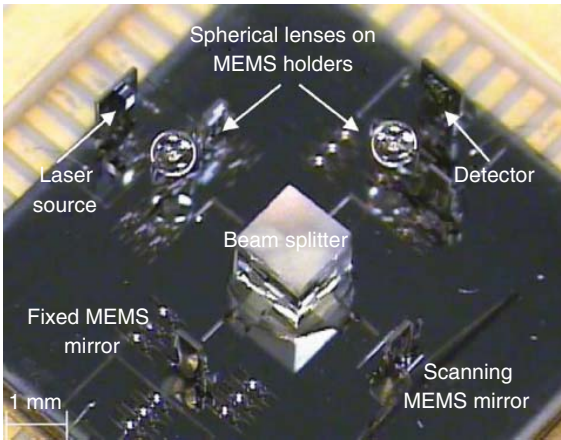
Microspectrometer assembled with robots and gripping tools (ARRI Institute, USA). (Courtesy of ARRI institute.)
